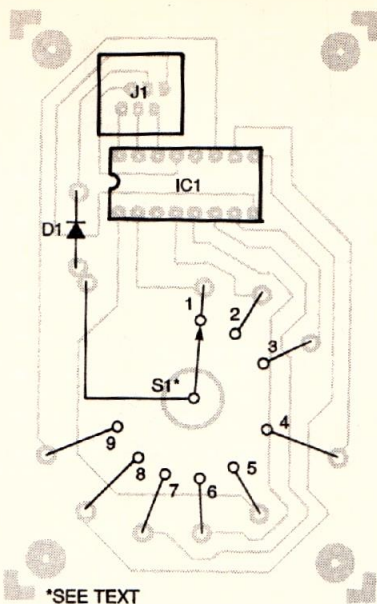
As you could guess from this parts-placement diagram, the low parts count of the keypad board makes assembling it easy. Mount the rotary switch on the solder side using short wires, and put its shaft through the board to the component side.
